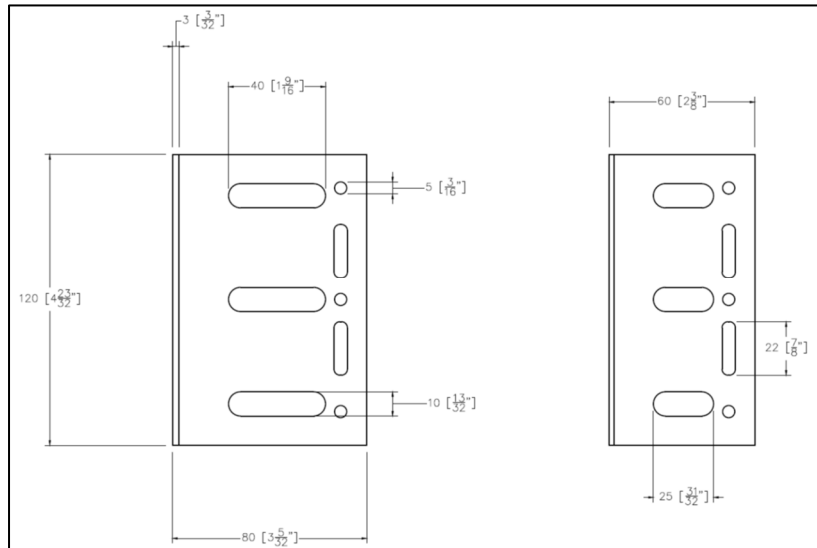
ESC ALUMINUM BRACKET mm [inches]
